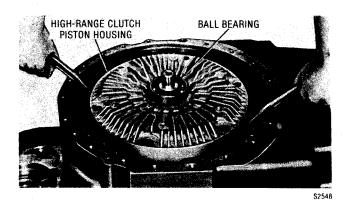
Removing high-range clutch piston housing (TT 2221-1, 2421-1 without converter-driven PTO)
